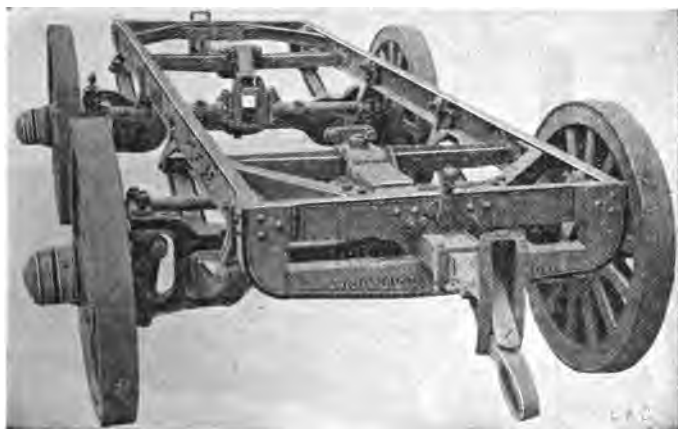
End View, Showing Construction of Trailer for Motor Trucks.
